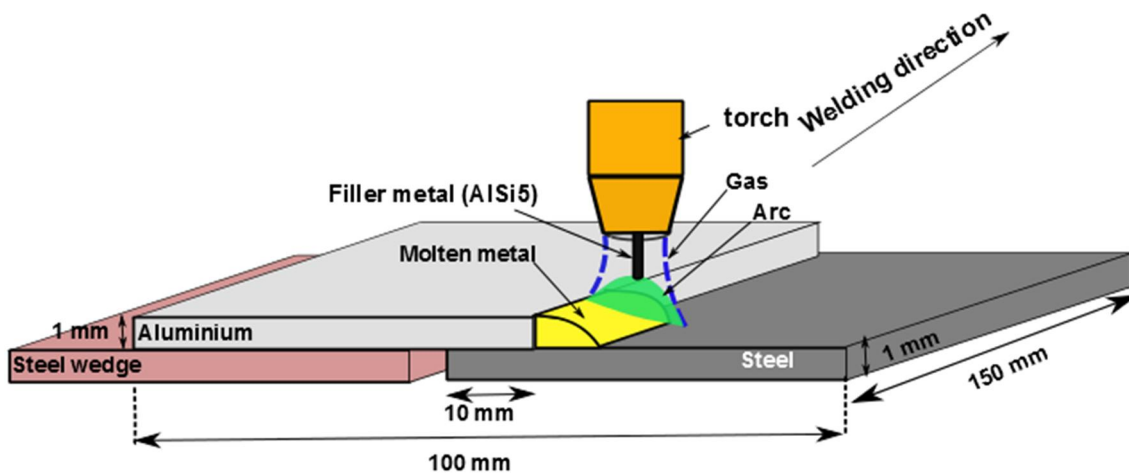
Schematic representation of steel/aluminium lap welding configuration.
